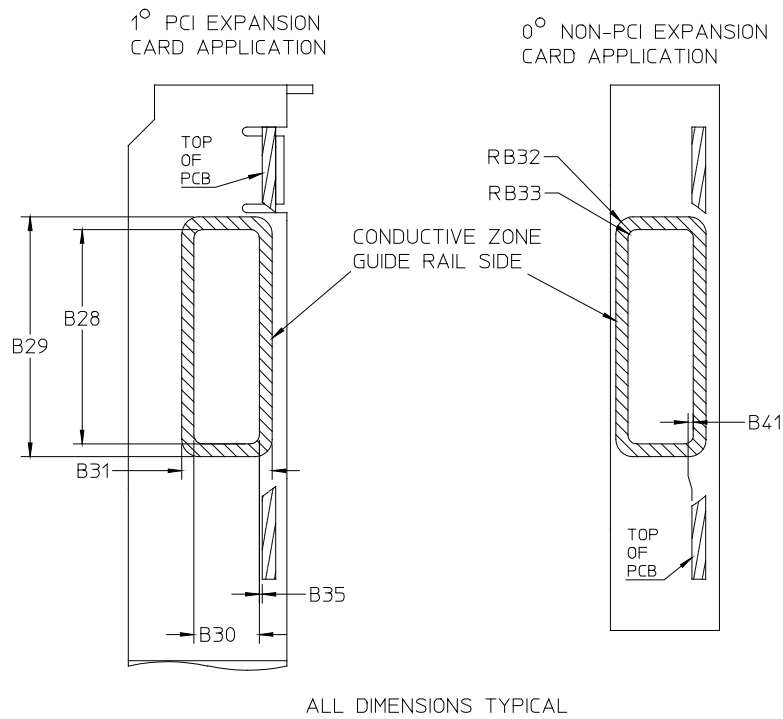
x8 EMI Guide Housing Assembly Bracket Window
